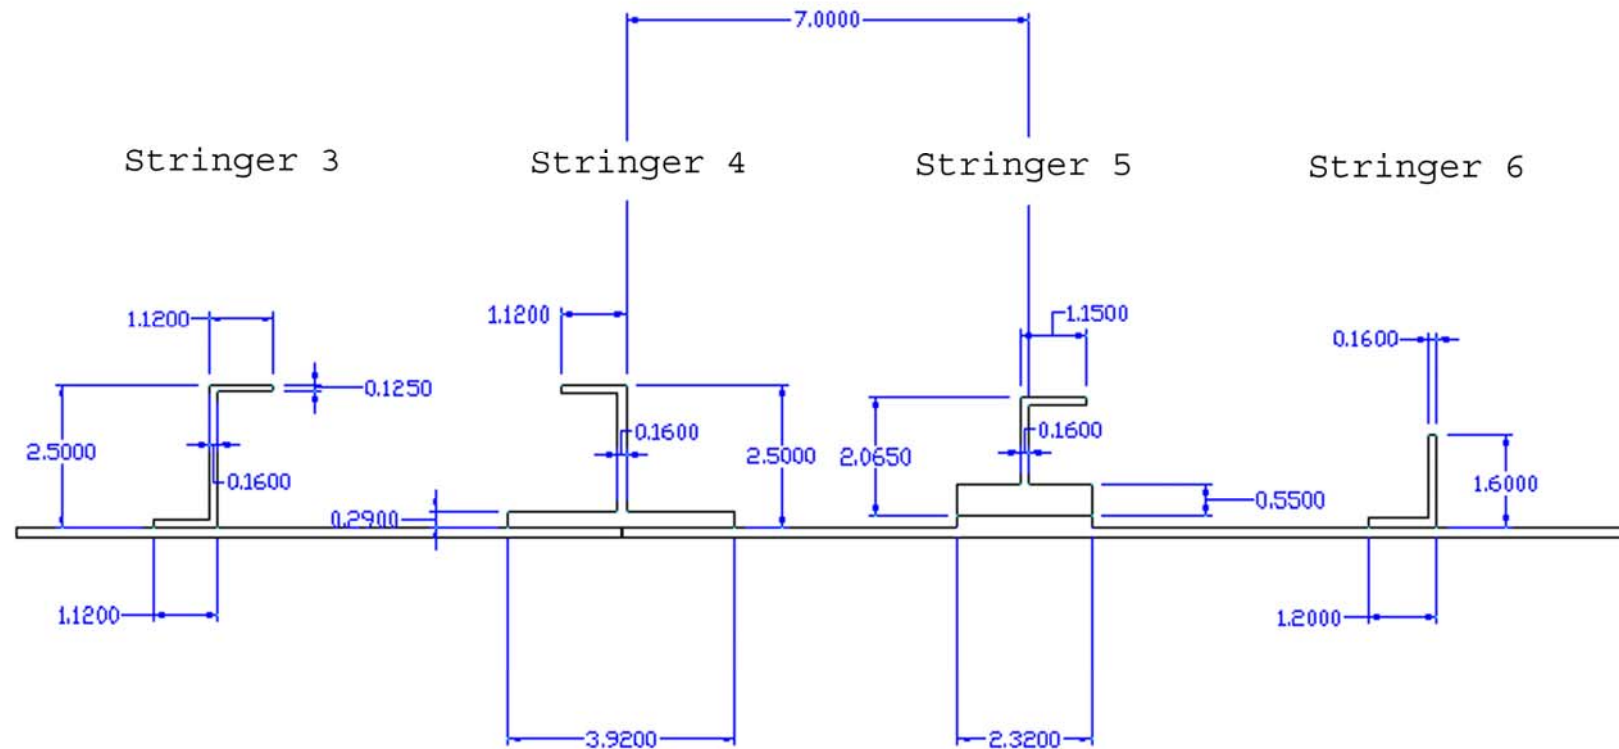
Typical geometry of the lower wing stringers (dimensions are given in inches).
